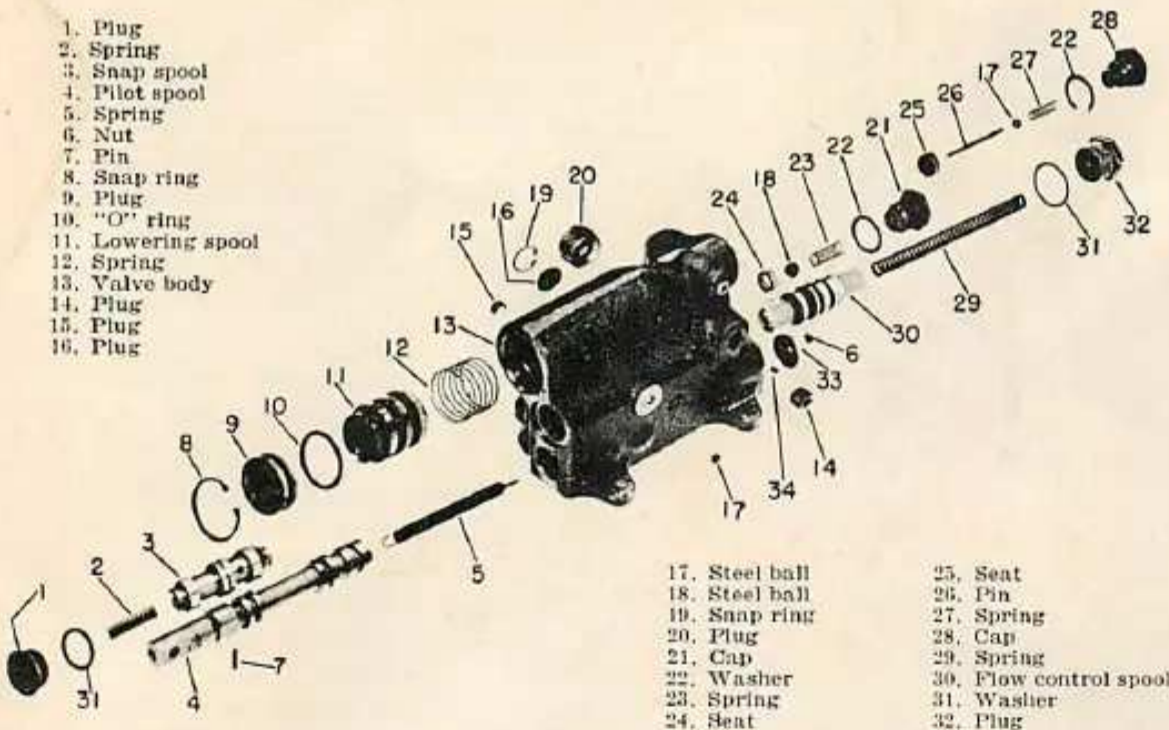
Exploded view of early servo valve (3-point hitch control valve). Late production valve (see Fig. O158) has redesigned snap spool (3) which eliminates need of extra check valve (18) shown at upper left side of valve body (13).
